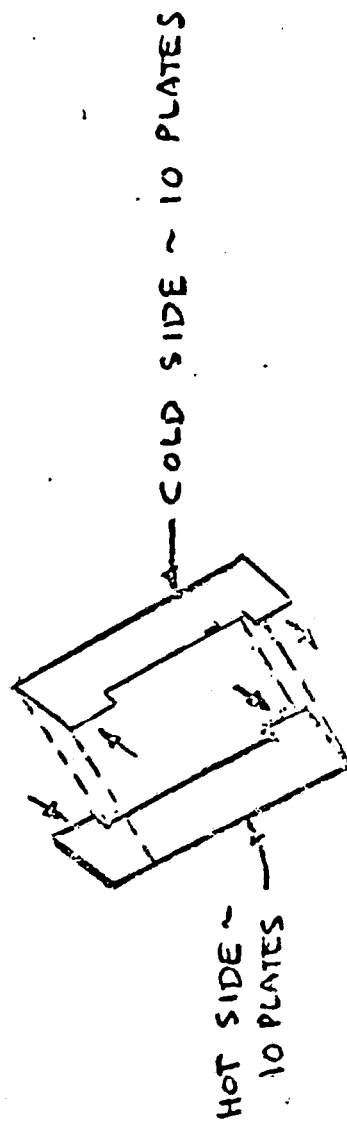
50,000 B/H CONTACT HX DESIGN
